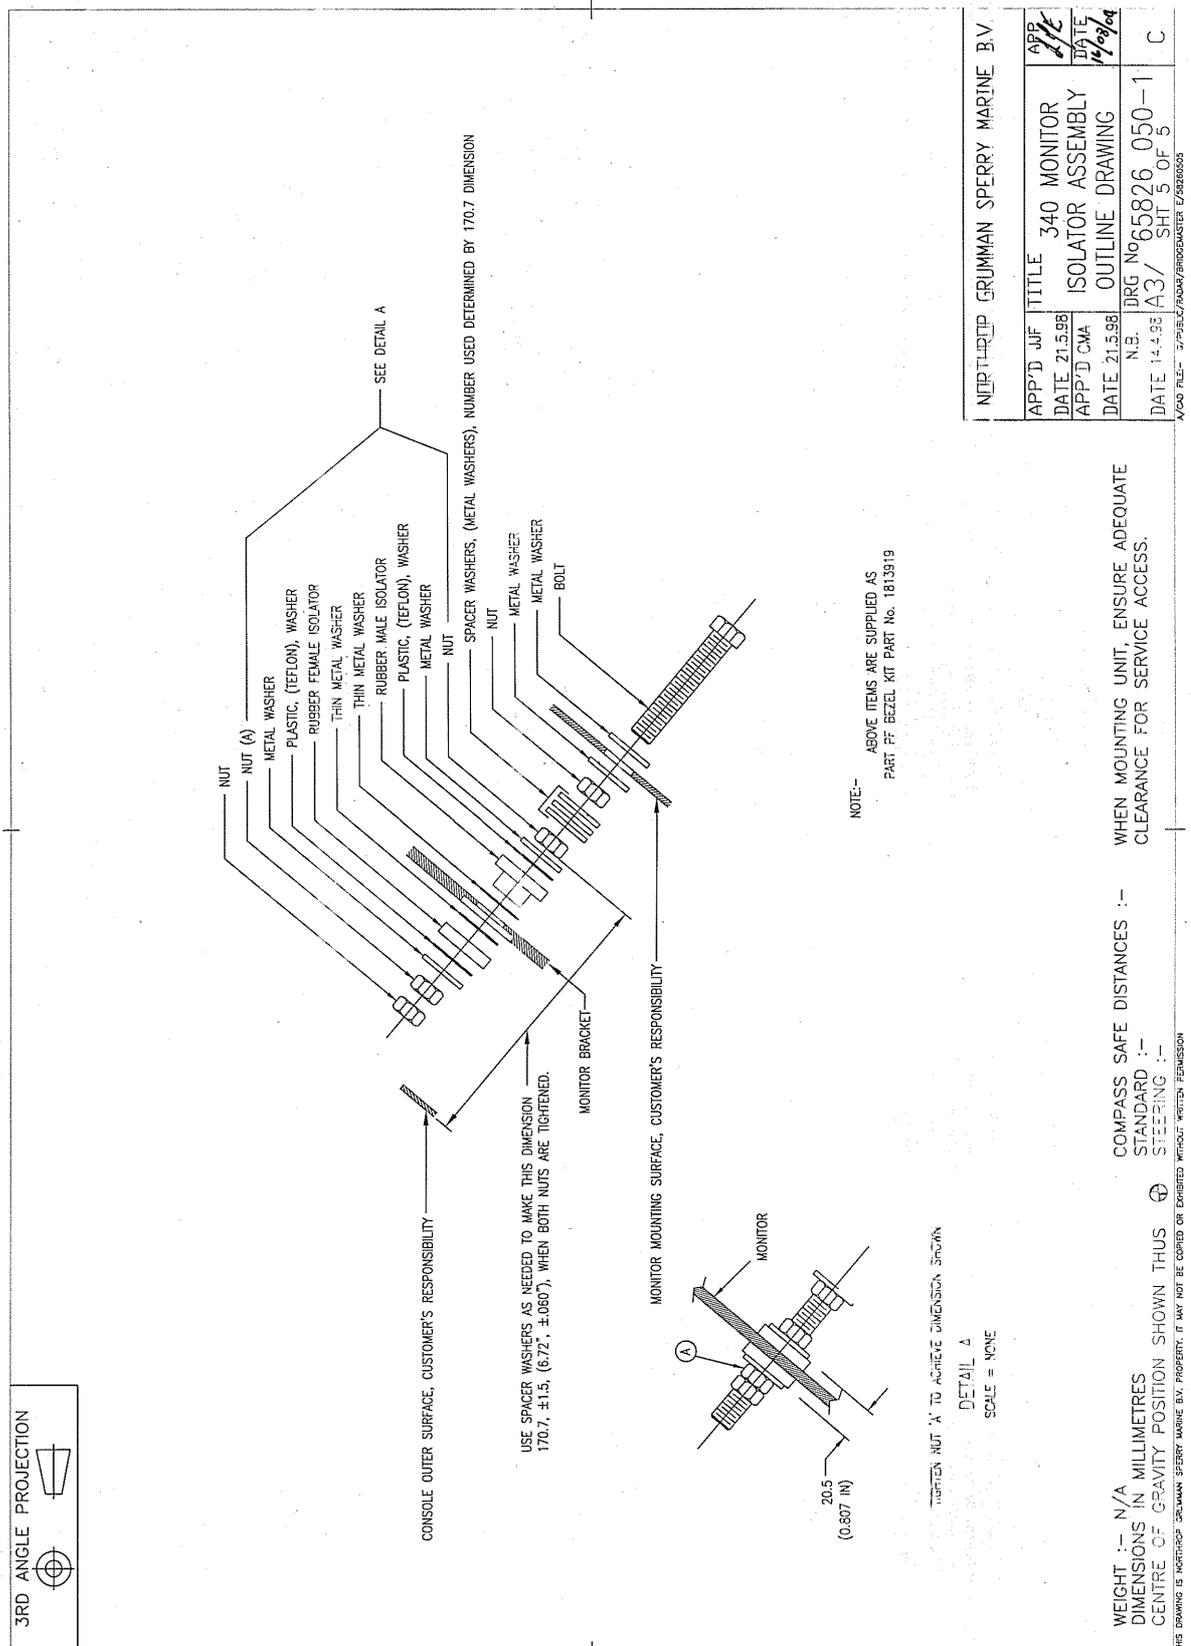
340 Monitor Module (CRT) Outline Drawing (Sheet 5 of 5)
